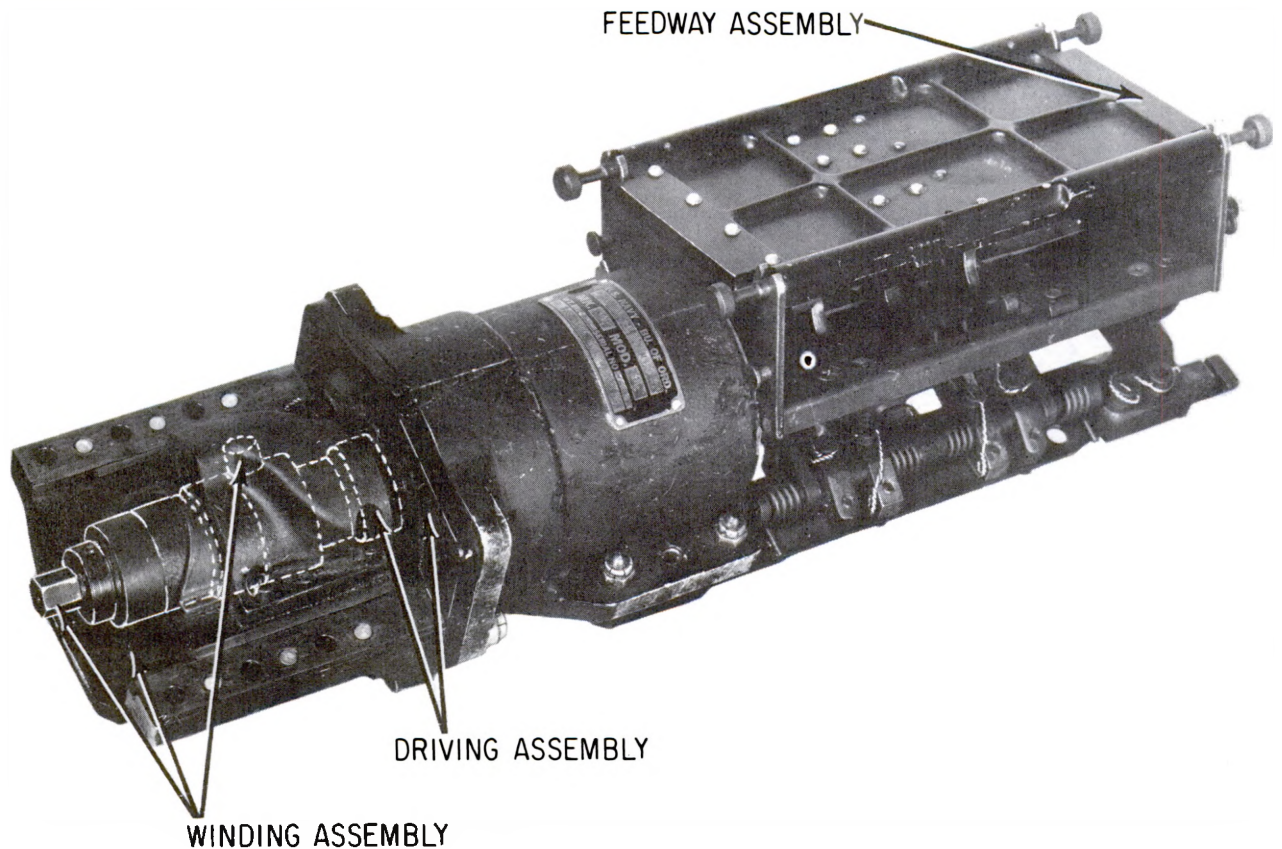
20mm Feed Mechanism Mk 9 Mod 4.
